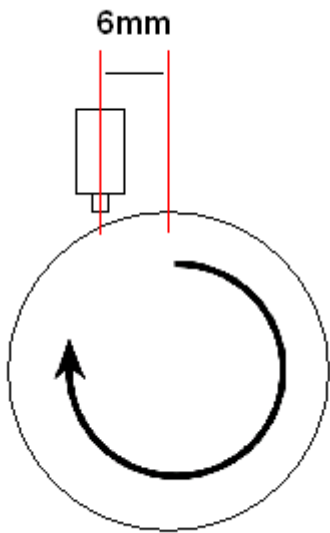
A diagram illustrating the tool offset with respect to the highest point of the rotating pipe sections. The offset is parallel to the weld seam and results in the desired contact condition. This offset configuration reduced vibration and improved weld quality in comparison to the case without offset.
